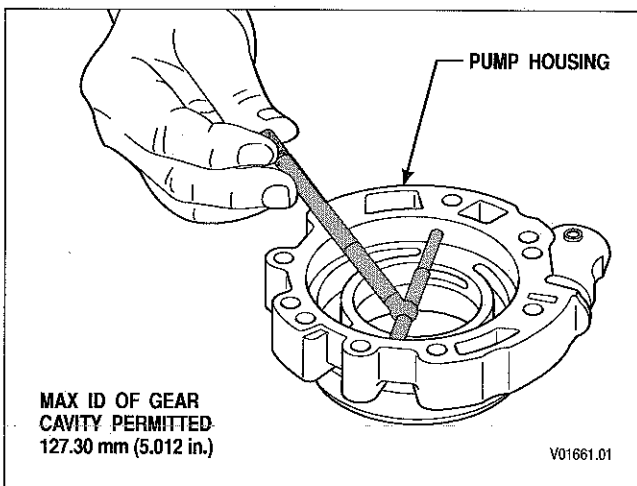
Measuring Gear-Cavity Diameter In The Pump Housing
